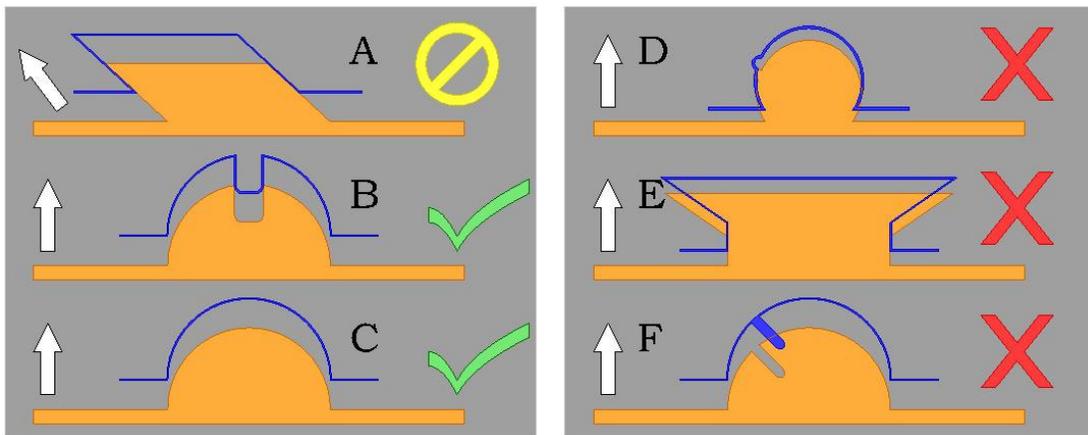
CNC Milling and Plug Design Limitations – cutaway front view.
